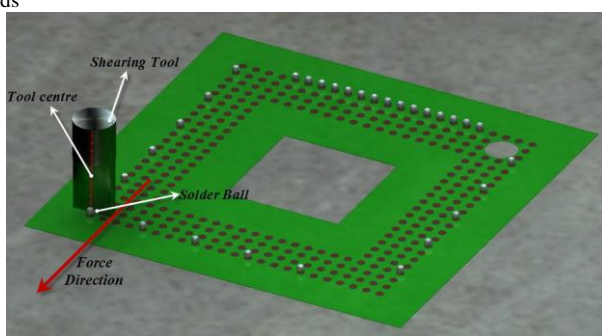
Schematic of BGA substrate showing the location of mounted solder balls and positioning of shear tool during ball shear testing.
